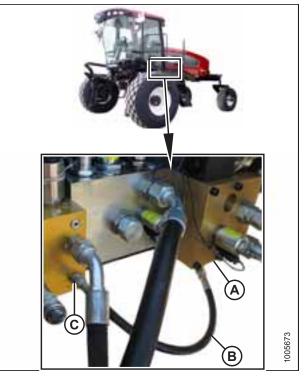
Jumper Hose Position – A40D on M200 Shown (M150, M155, and M155*E4* Similar)
